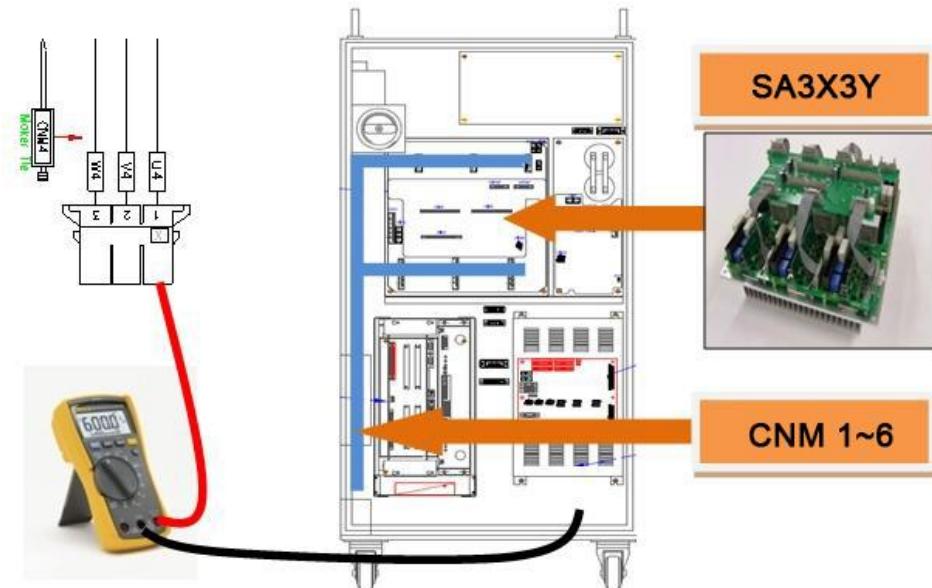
Examining the Output Cable of Servo Drive Unit (Hi5-N00 controller)
